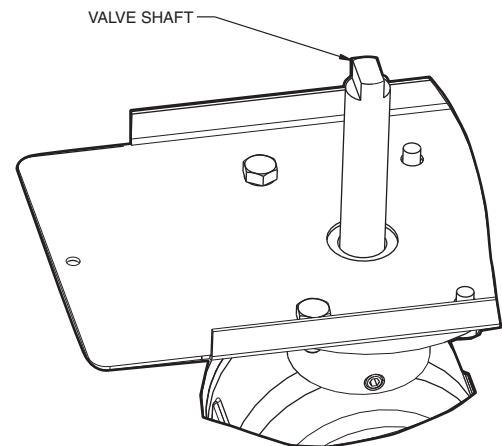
Fully Open Ball Valve with Actuator Removed
